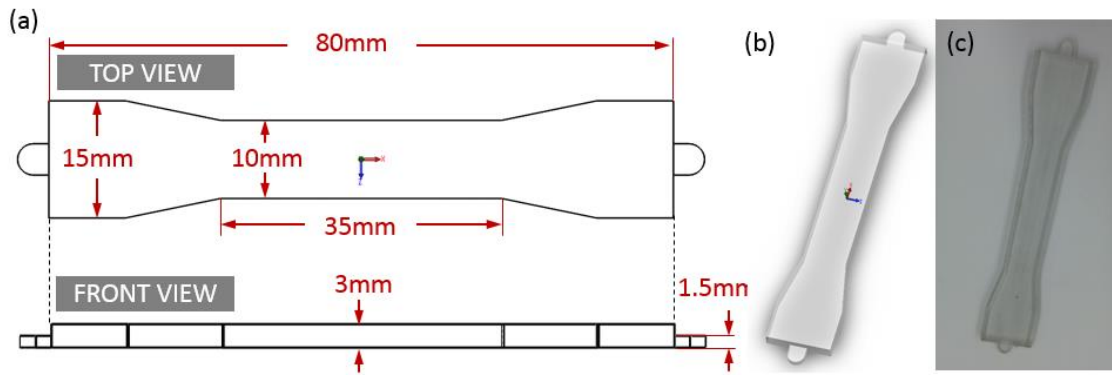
3D printed dog-bone coupon: a) dimensions; b) Solidworks 3D design model; c) printed coupon.
